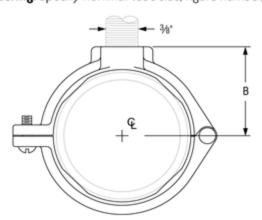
R: LOADS (LBS) • WEIGHT (LBS) • DIMENSIONS (IN)
